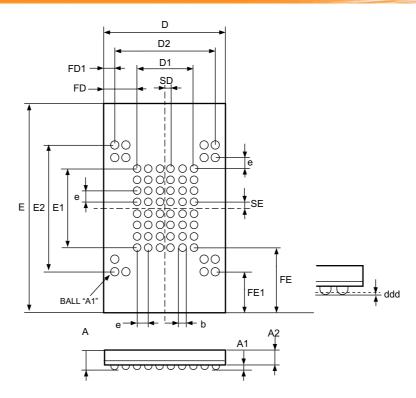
63-ball FBGA - 9 x 11 ball array 0.8mm pitch, Package Outline
